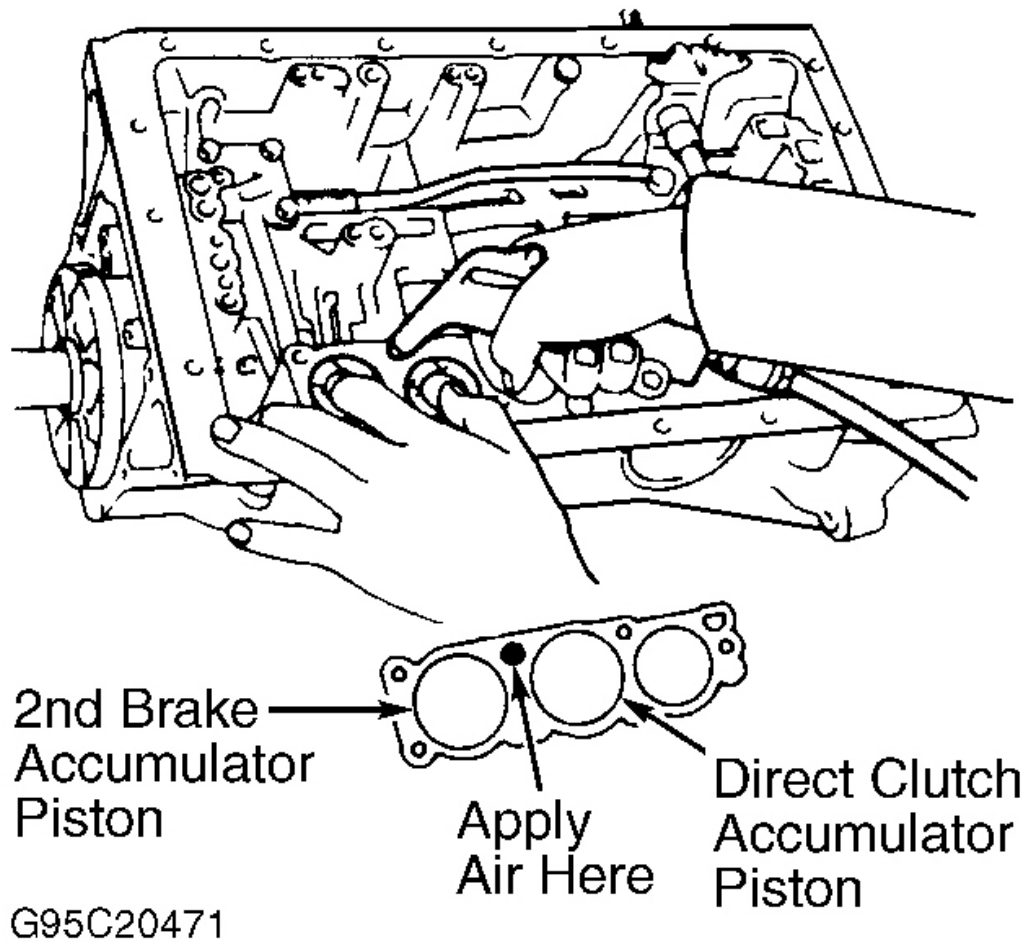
Removing Direct Clutch (C2) & 2nd Brake (B2) Accumulator Pistons & Springs
